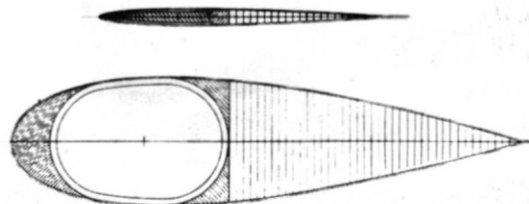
ABC BLADE CROSS SECTIONS AT ROOT AND TIP.
